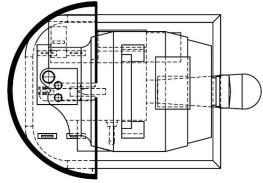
Shows a schematic diagram of the cover assembly with the Straight knife fabric cutting machine.
